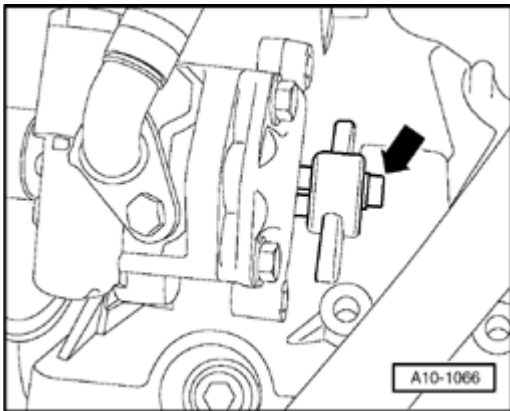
Unbolting Power Steering Pump From Rear Bracket
